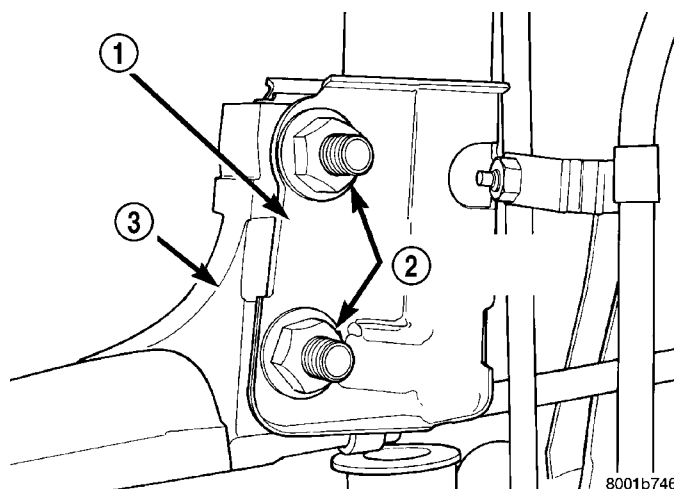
Strut To Steering Knuckle Attaching Bolts
